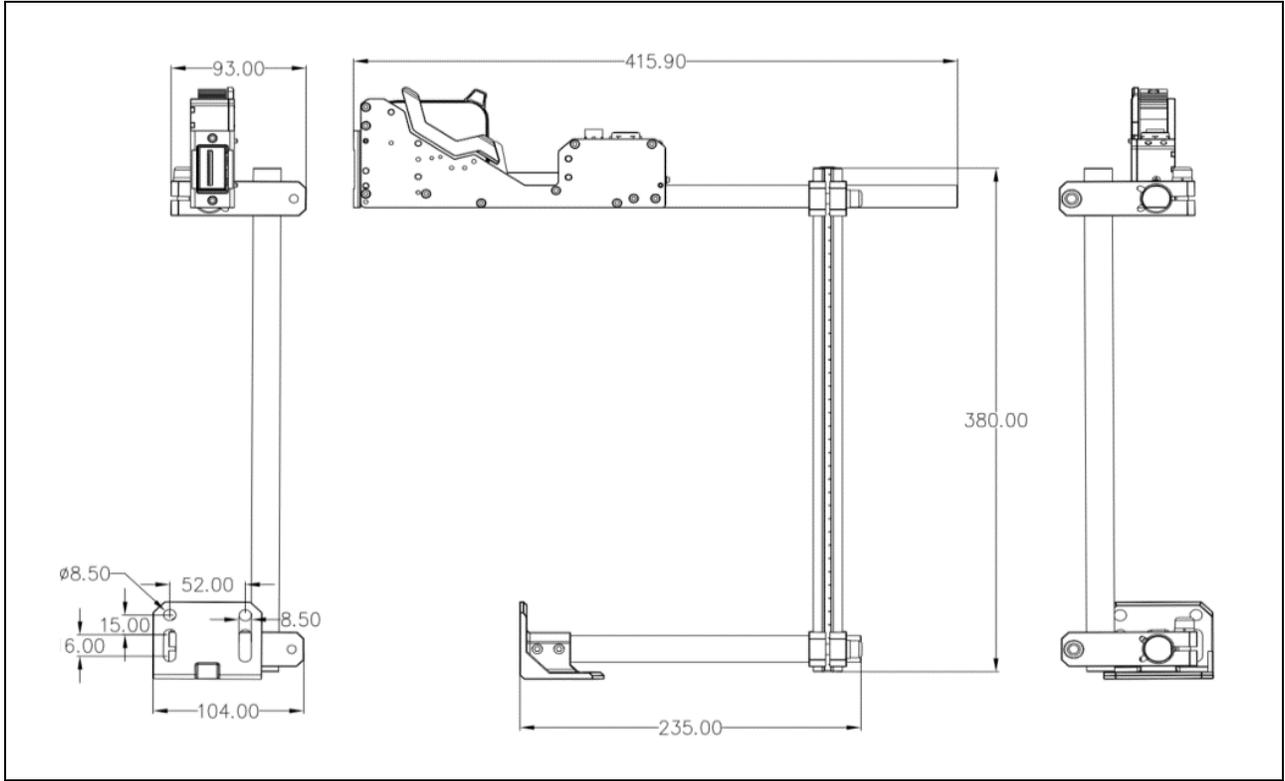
X1 Printhead Type H and Brackets Dimension
